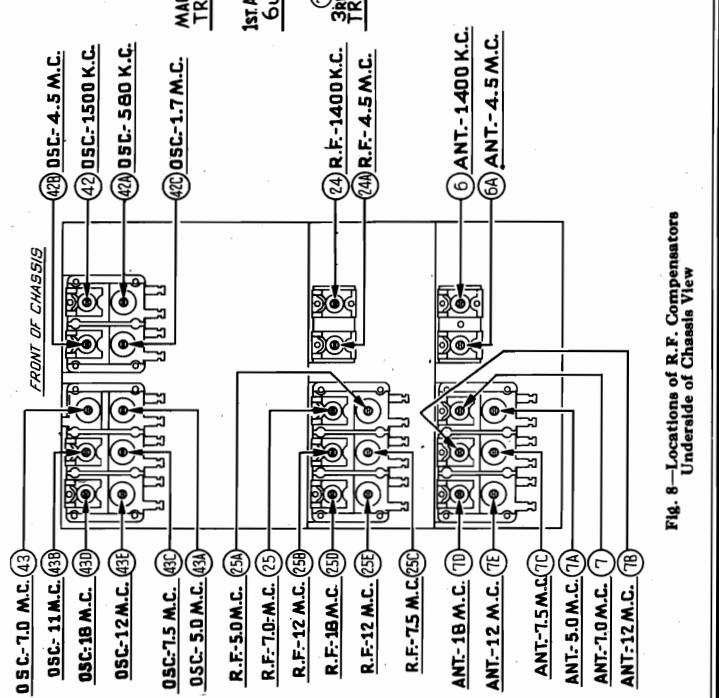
Locations of R.F. Compensators—Underside of Chassis View
